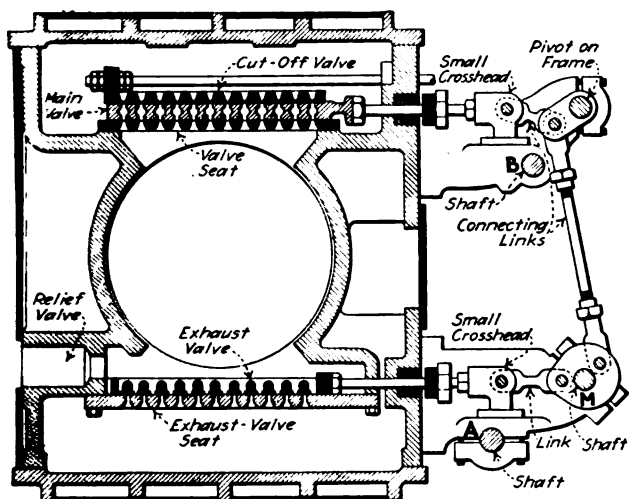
Section through head of McIntosh & Seymour engine showing main-valve operating-mechanism.
